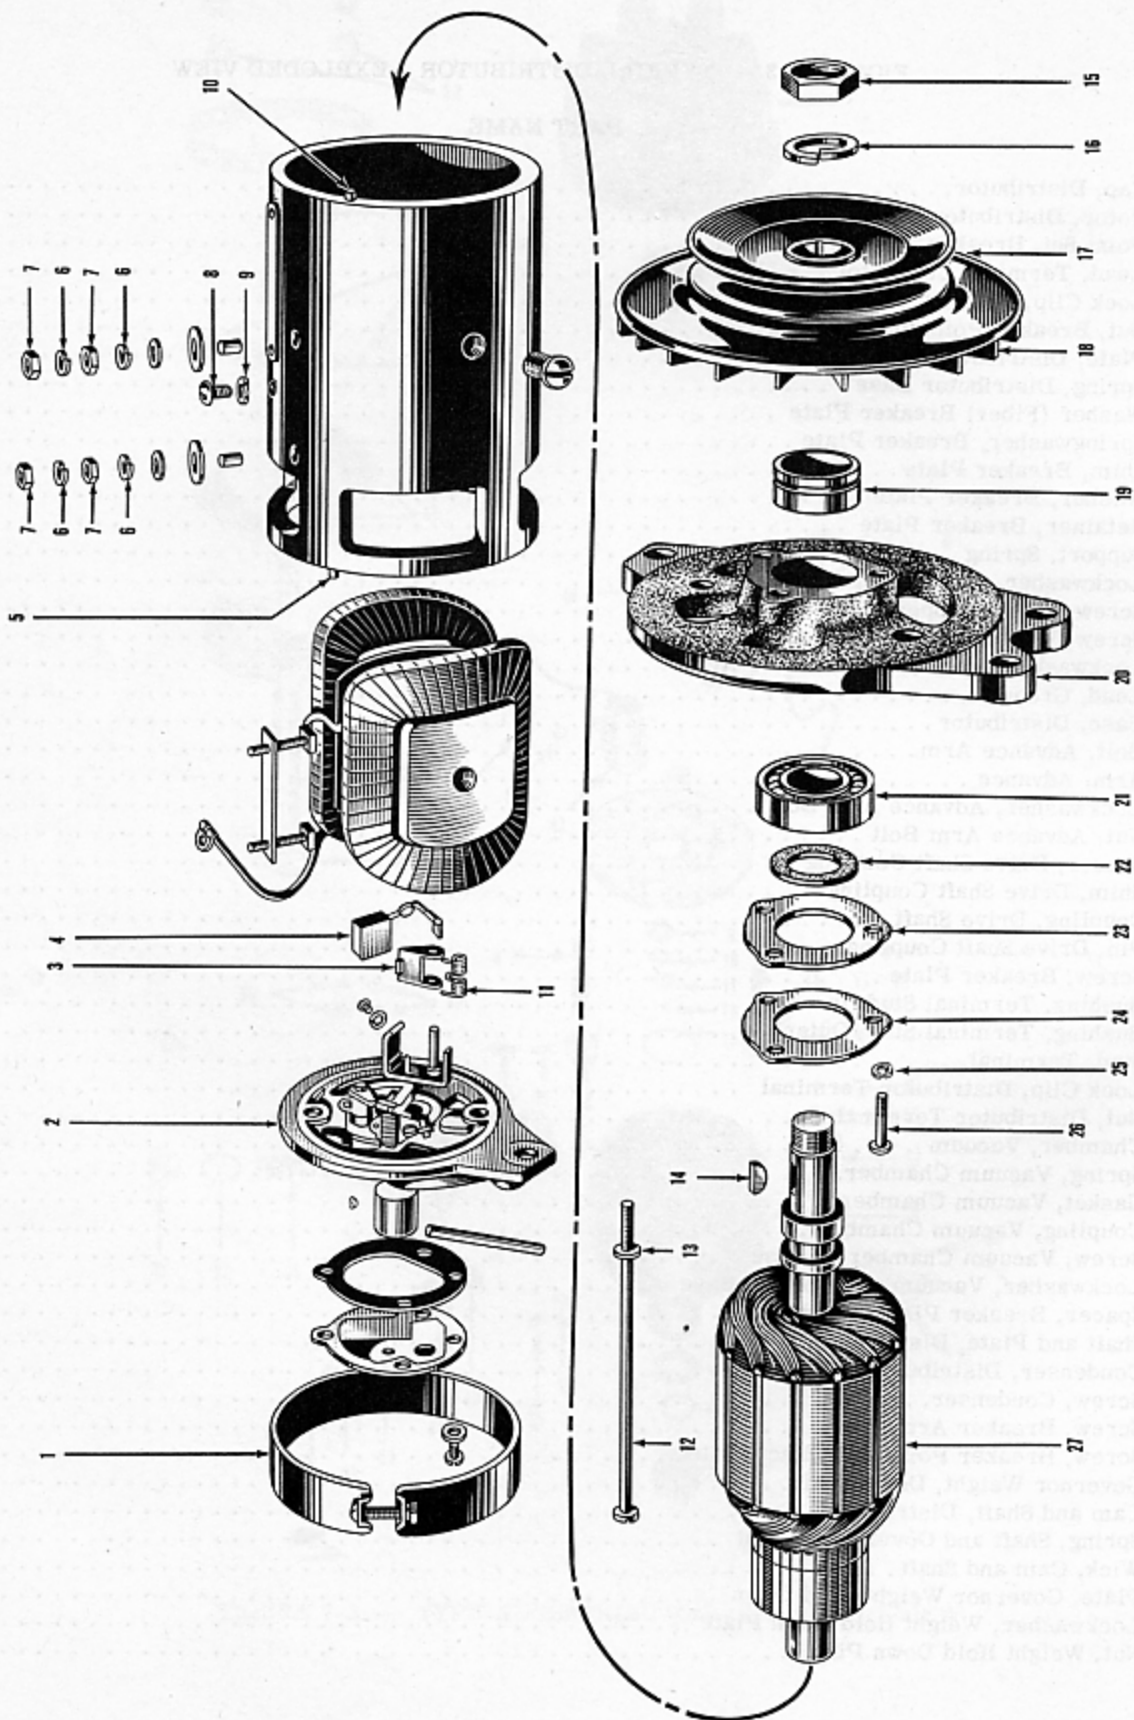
TYPICAL GENERATOR - EXPLODED VIEW
